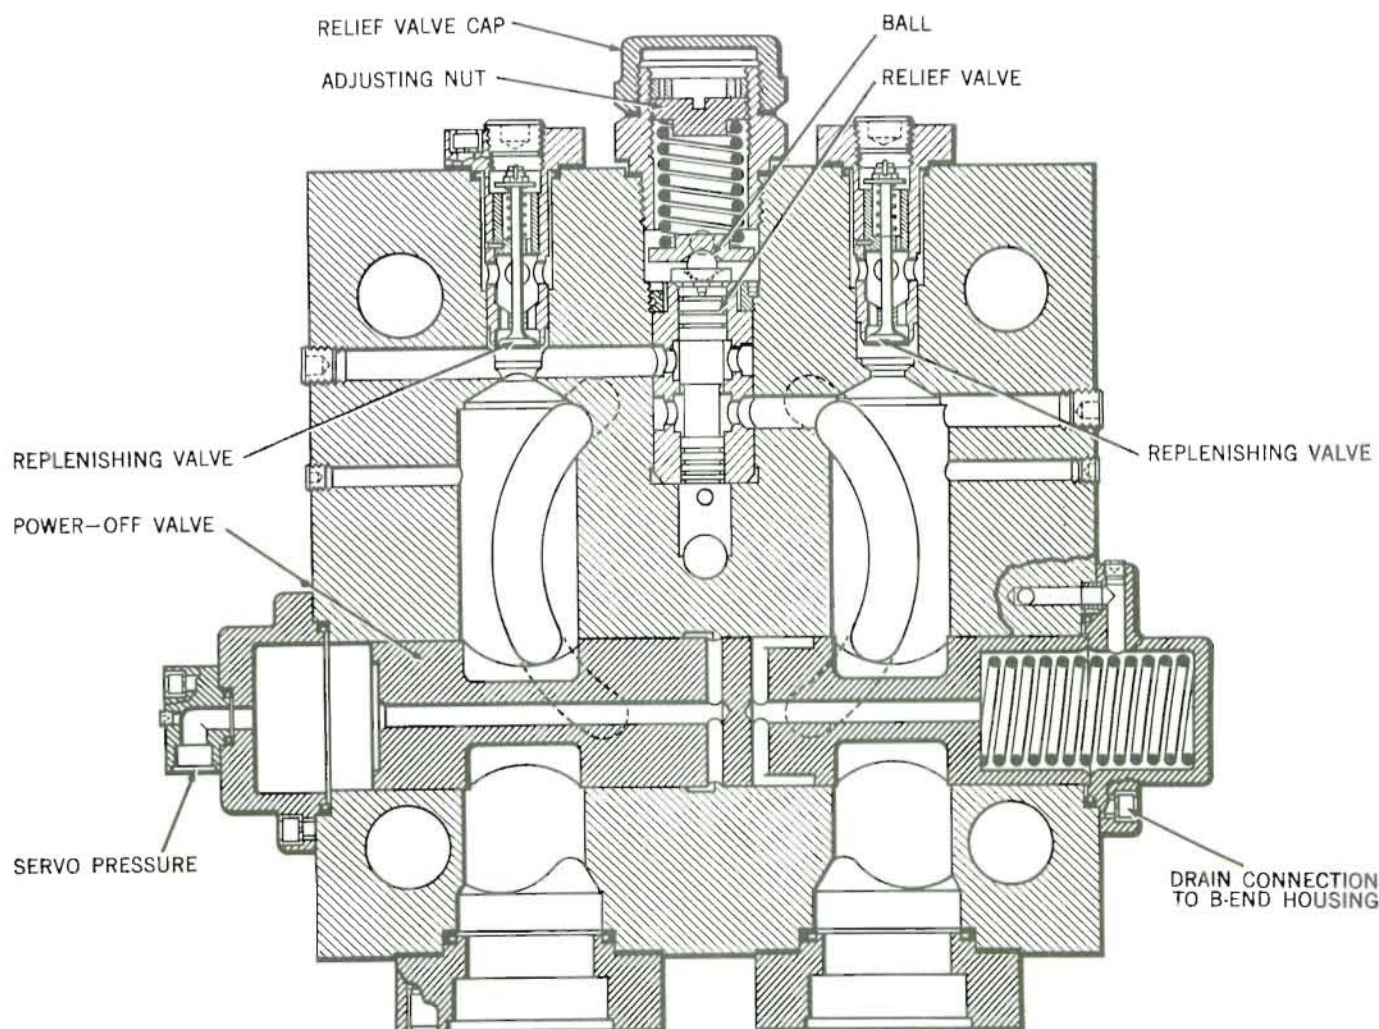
Elevating Gear B-end Relief Valve Adjustment, Sectional View
